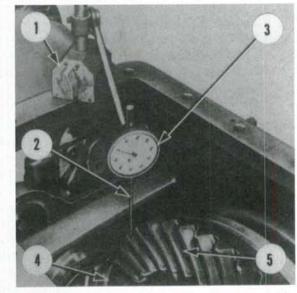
Check backlash between ring gear and bevel pinion using a dial indicator as shown.
